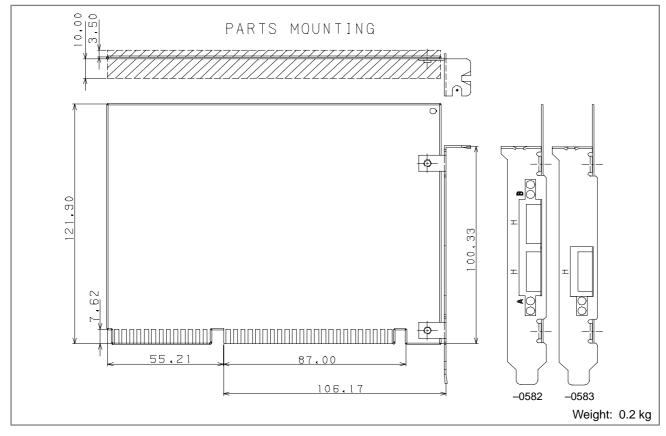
(b) High-speed serial bus interface board type 2 (PC) Specification No.: A20B-8001-0583 (1 CH) A20B-8001-0582 (2 CH)
